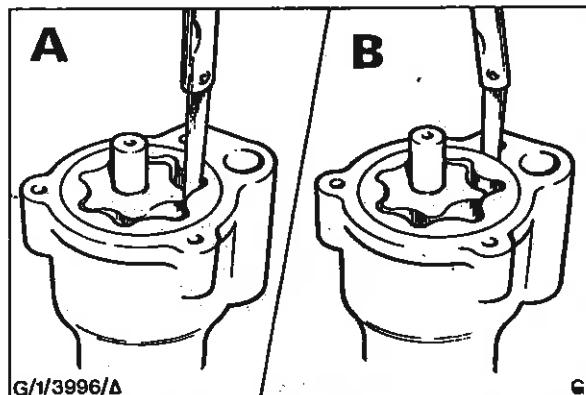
Measuring Rotor Lobe/Body Clearance
